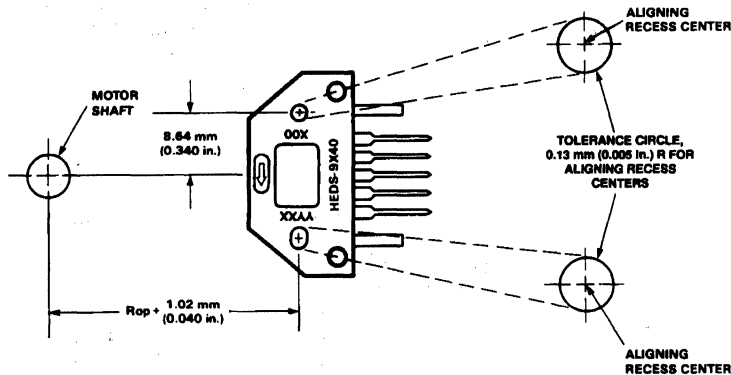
HEDS-9X40 Mounting Tolerance.
